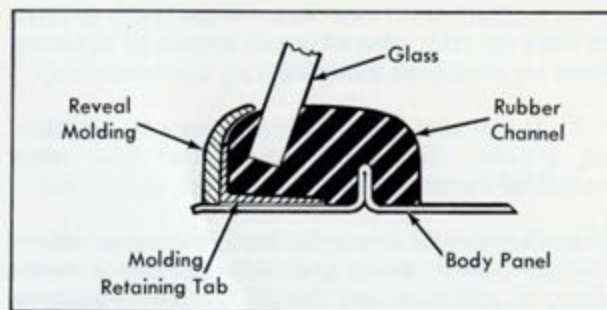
Windshield and Back Window Reveal Molding Attachment
